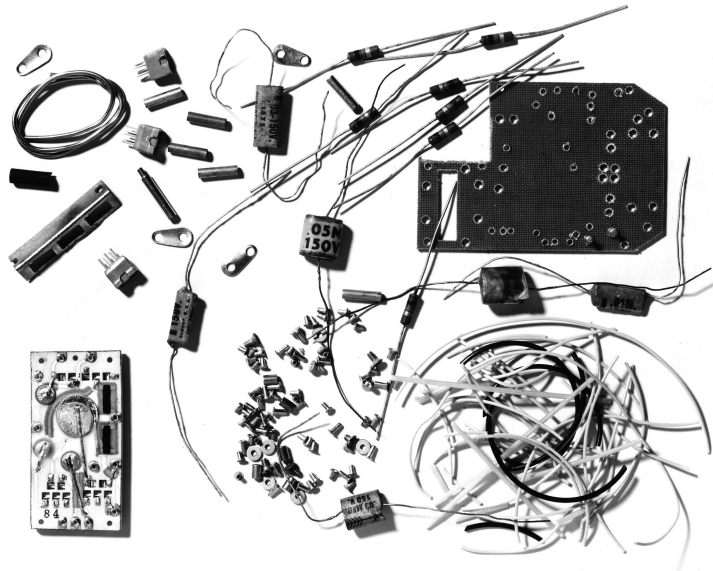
Solo-pak hearing aid printed circuit (left lower corner), compared to previous hard wires and discrete components. (Courtesy of Kenneth Berger Hearing Aid Museum and Archives)
